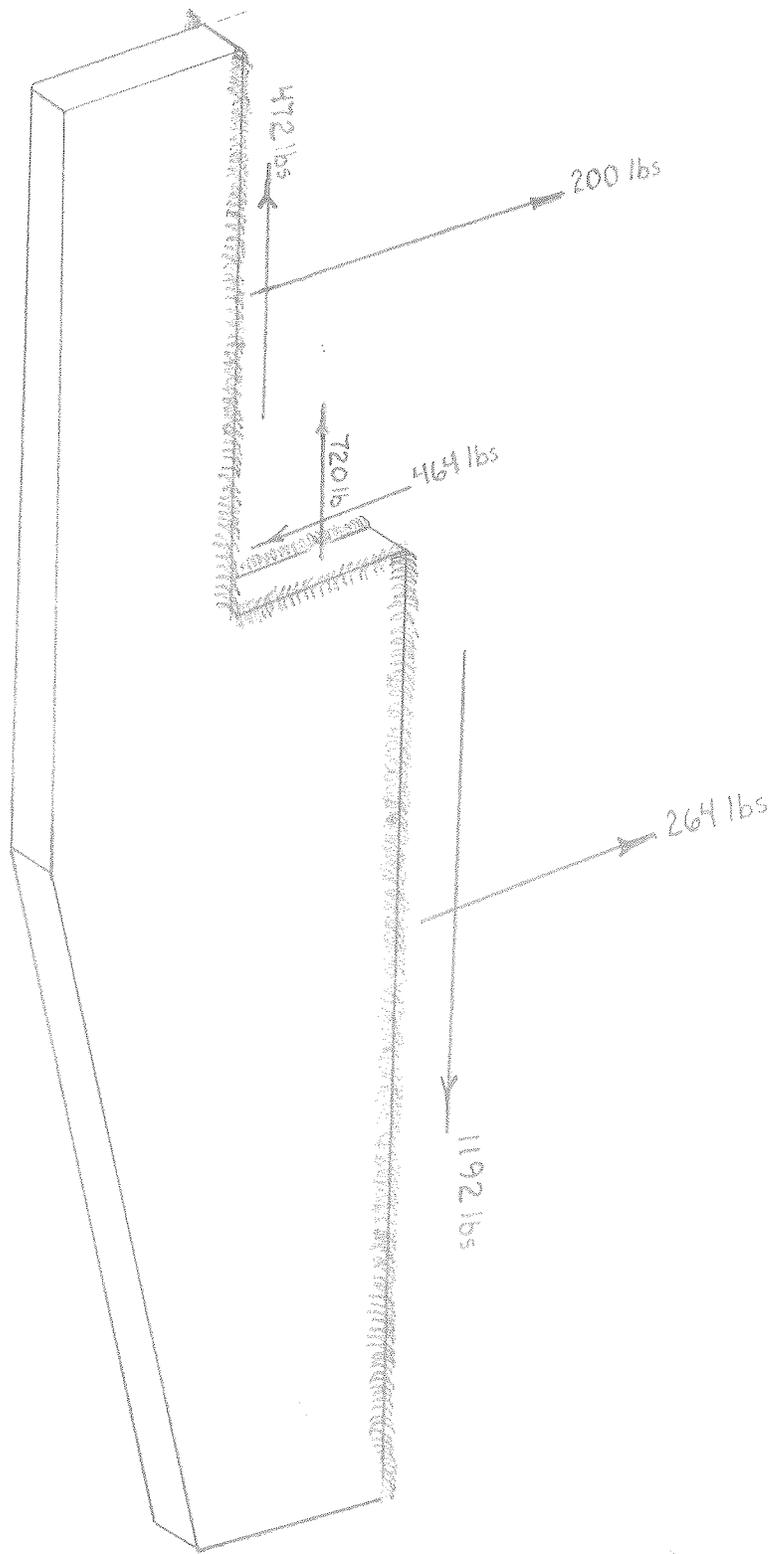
Forces on Fillet Welds in Tophat/Vacuum Shell Gusset
